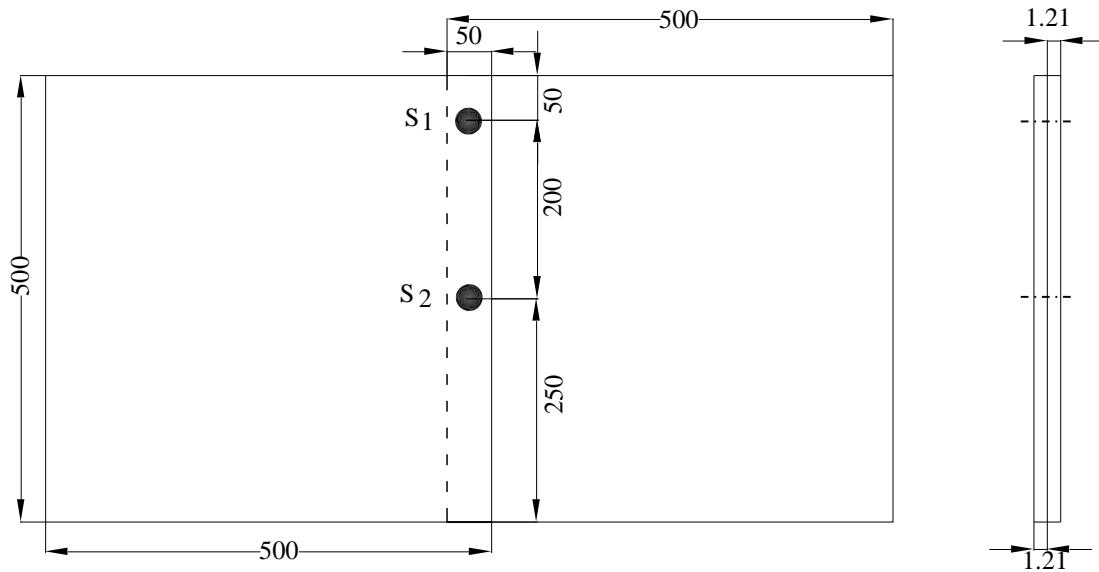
Geometric dimensions of plates with spot- welds (Case-3)
